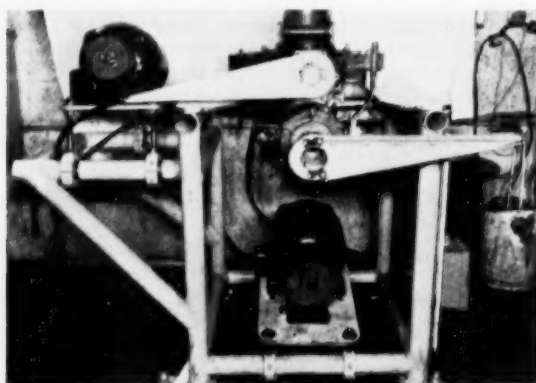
CLUTCH-TORQUE ADJUSTMENT ON HUP AFT TRANSMISSION
